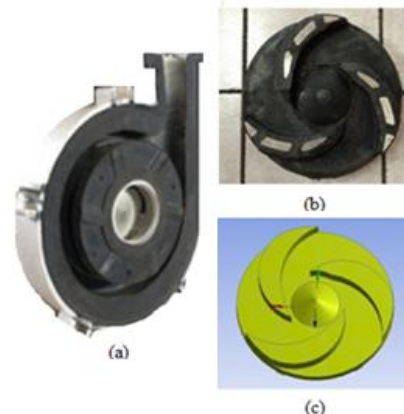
Original rubber coated centrifugal slurry pump (a) and impeller (b), impeller's CAD model (c) without shrouds
